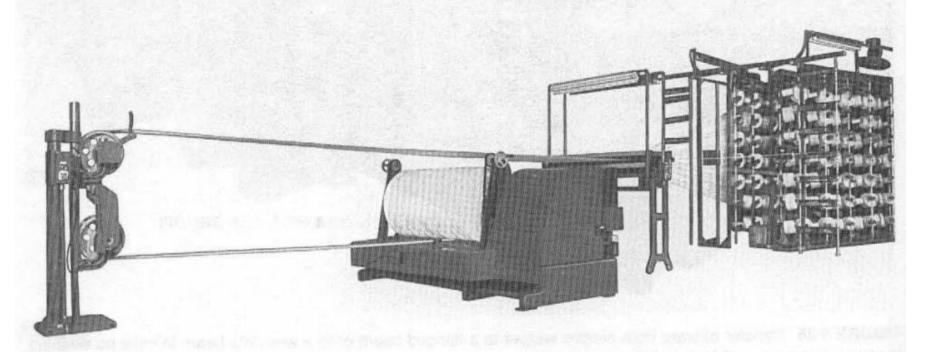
Winding on ball beam (courtesy of West Point Foundry and Machine Company).
